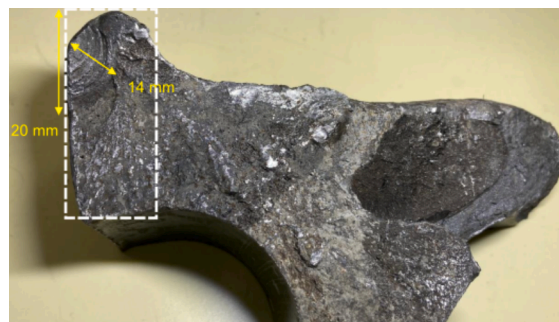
Fatigue crack at inside of flange causing the failure.
